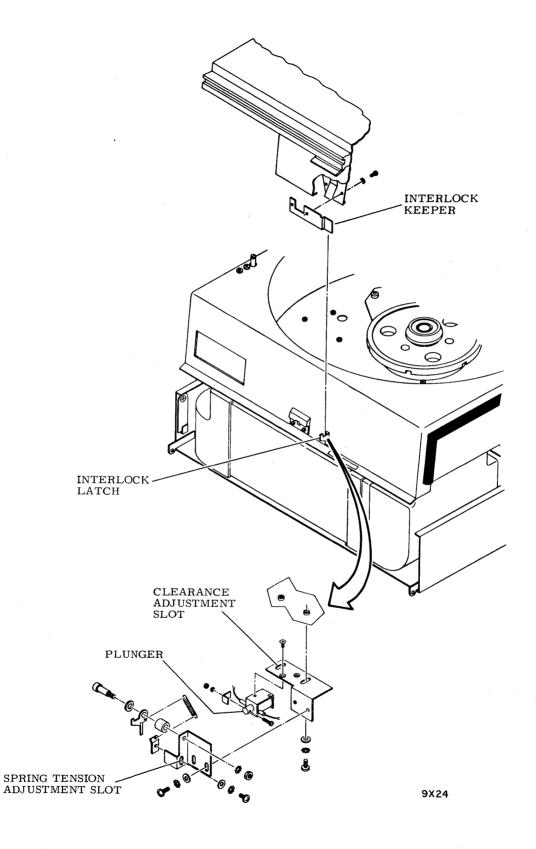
Pack Cover Solenoid Adjustment (Sheet 1 of 2) S/C 16 & Below
